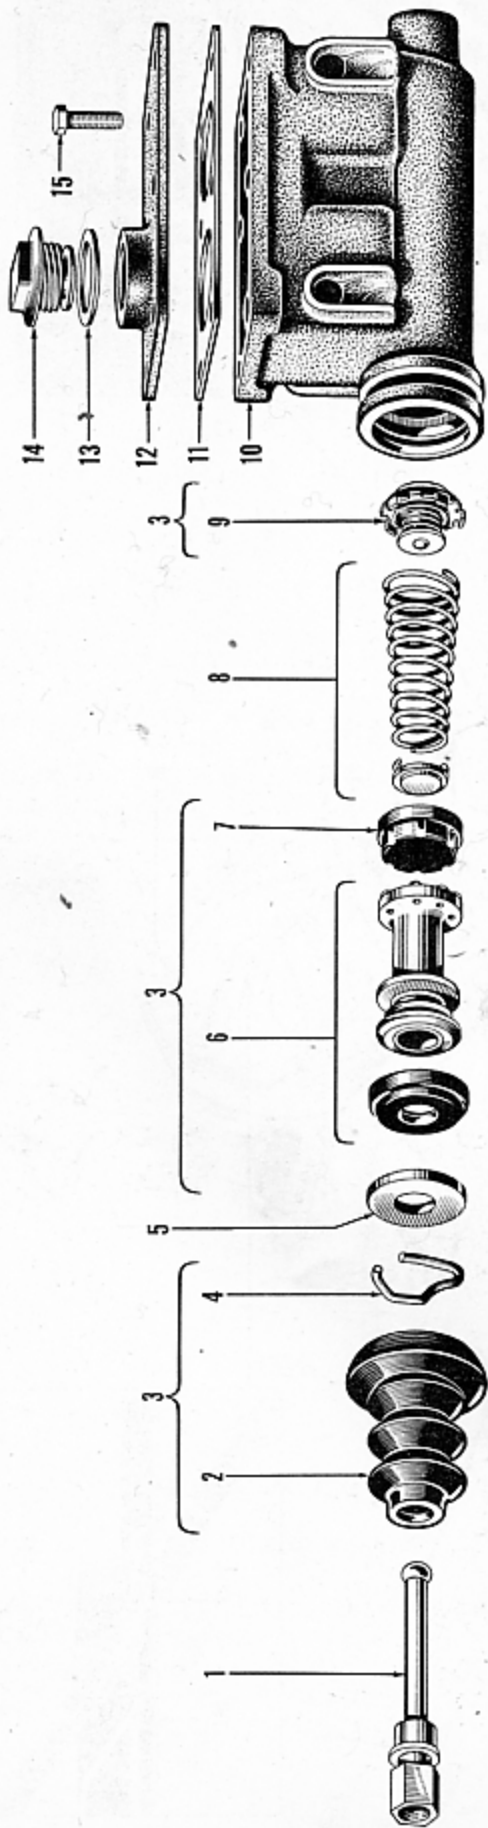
TYPICAL MASTER BRAKE CYLINDER - EXPLODED VIEW
